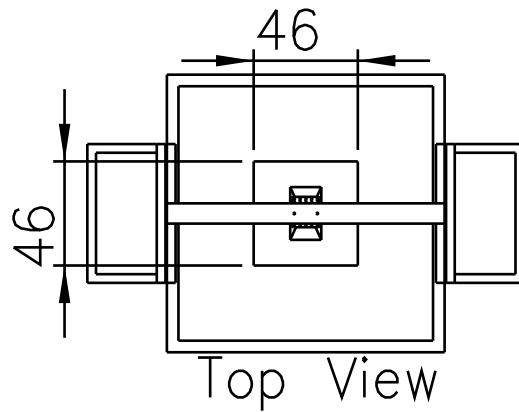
The Reduced Fixture's key dimensions are shown. The reducer insert can be quickly added to/removed from the One Meter Fixture depending on an experiment's requirements.
